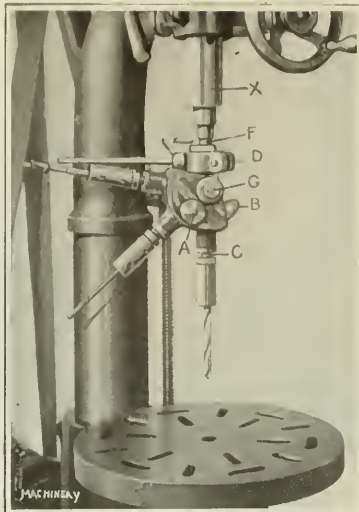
Eisler Three-spindle Turret Head for Use on Drill Press
